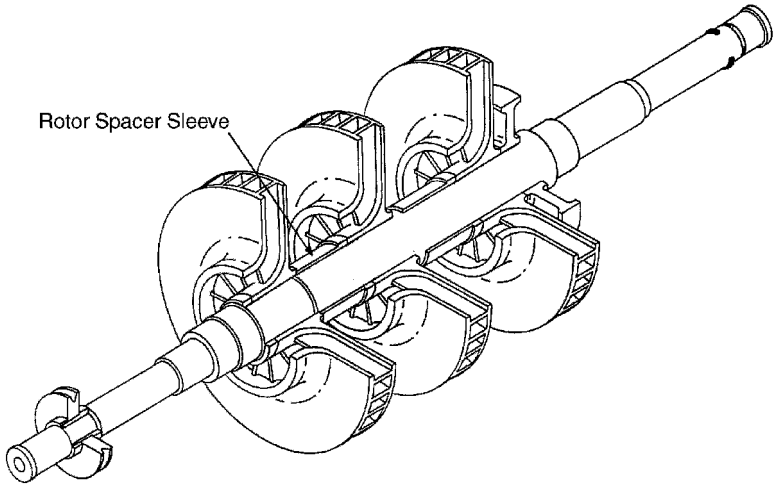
Spacer sleeves for a centrifugal compressor rotor. (*Dresser-Rand Company, Olean, N.Y.*)
